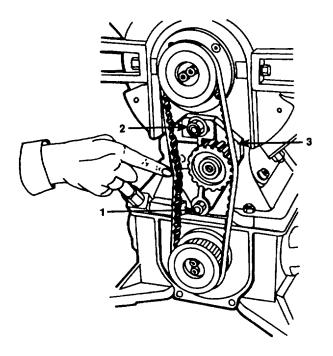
Oil Pump Drive Belt Adjustment 3-29
